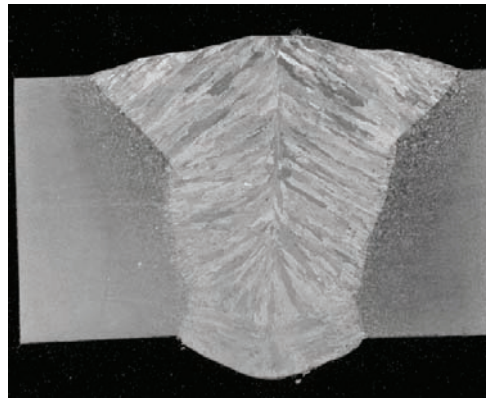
1/2” One-sided Weld – Macro 2.5X Mag
